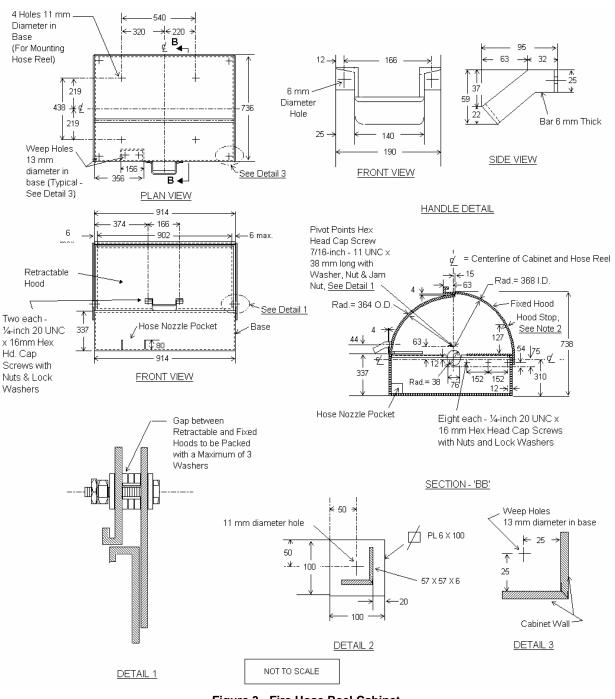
Fire Hose Reel Cabinet Typical Plan, Section and Details
